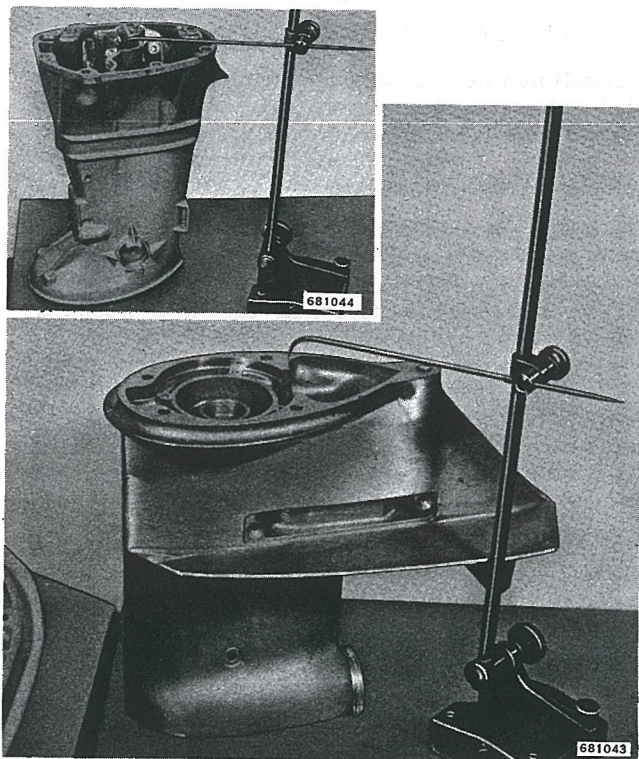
Checking Parallelism of Gearcase and Exhaust Housing
